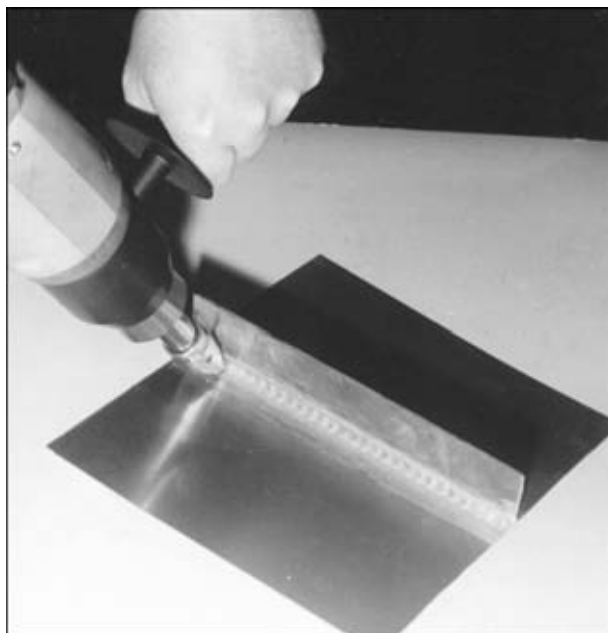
High-frequency peening of a fragment of the welded joint, performed with a manual tool
